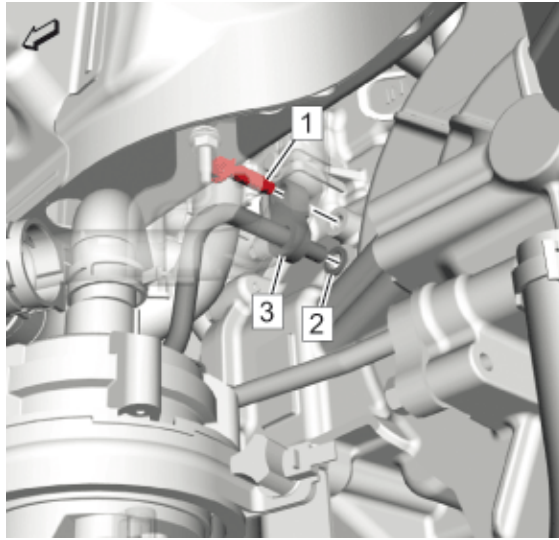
Transmission Fluid Cooler Inlet Pipe, Bolt And Sealing Washer
